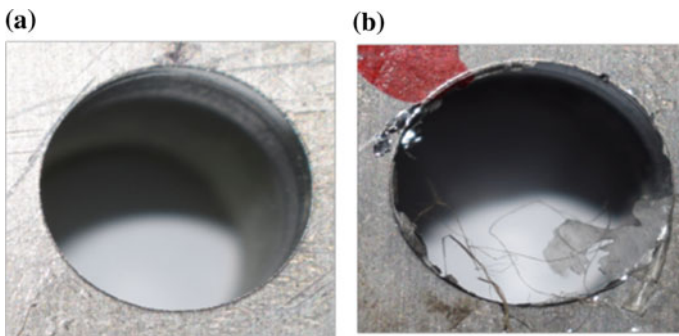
Drilled hole top view Expt #7 and the Expt #21
